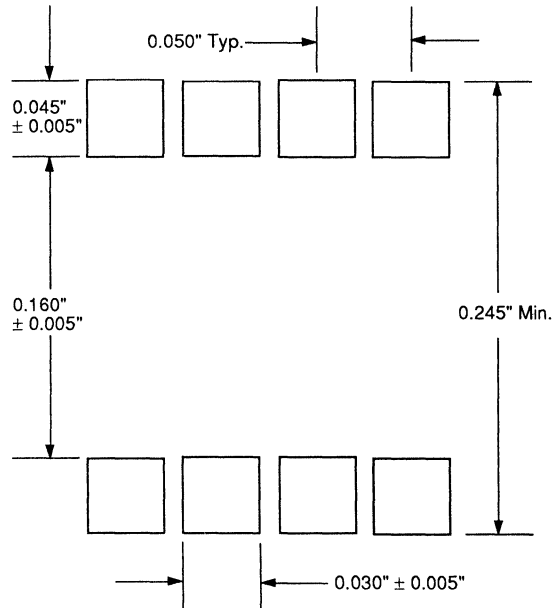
8-Lead SOIC Solder Pad Dimensions
